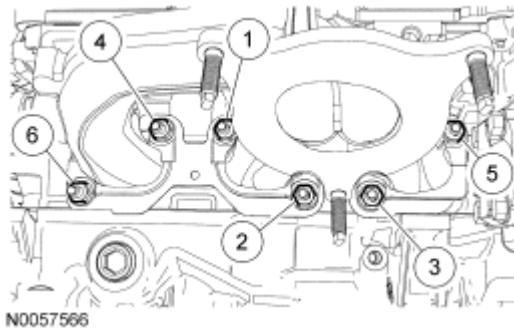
Identifying Tightening Sequence Of RH Exhaust Manifold Nuts
